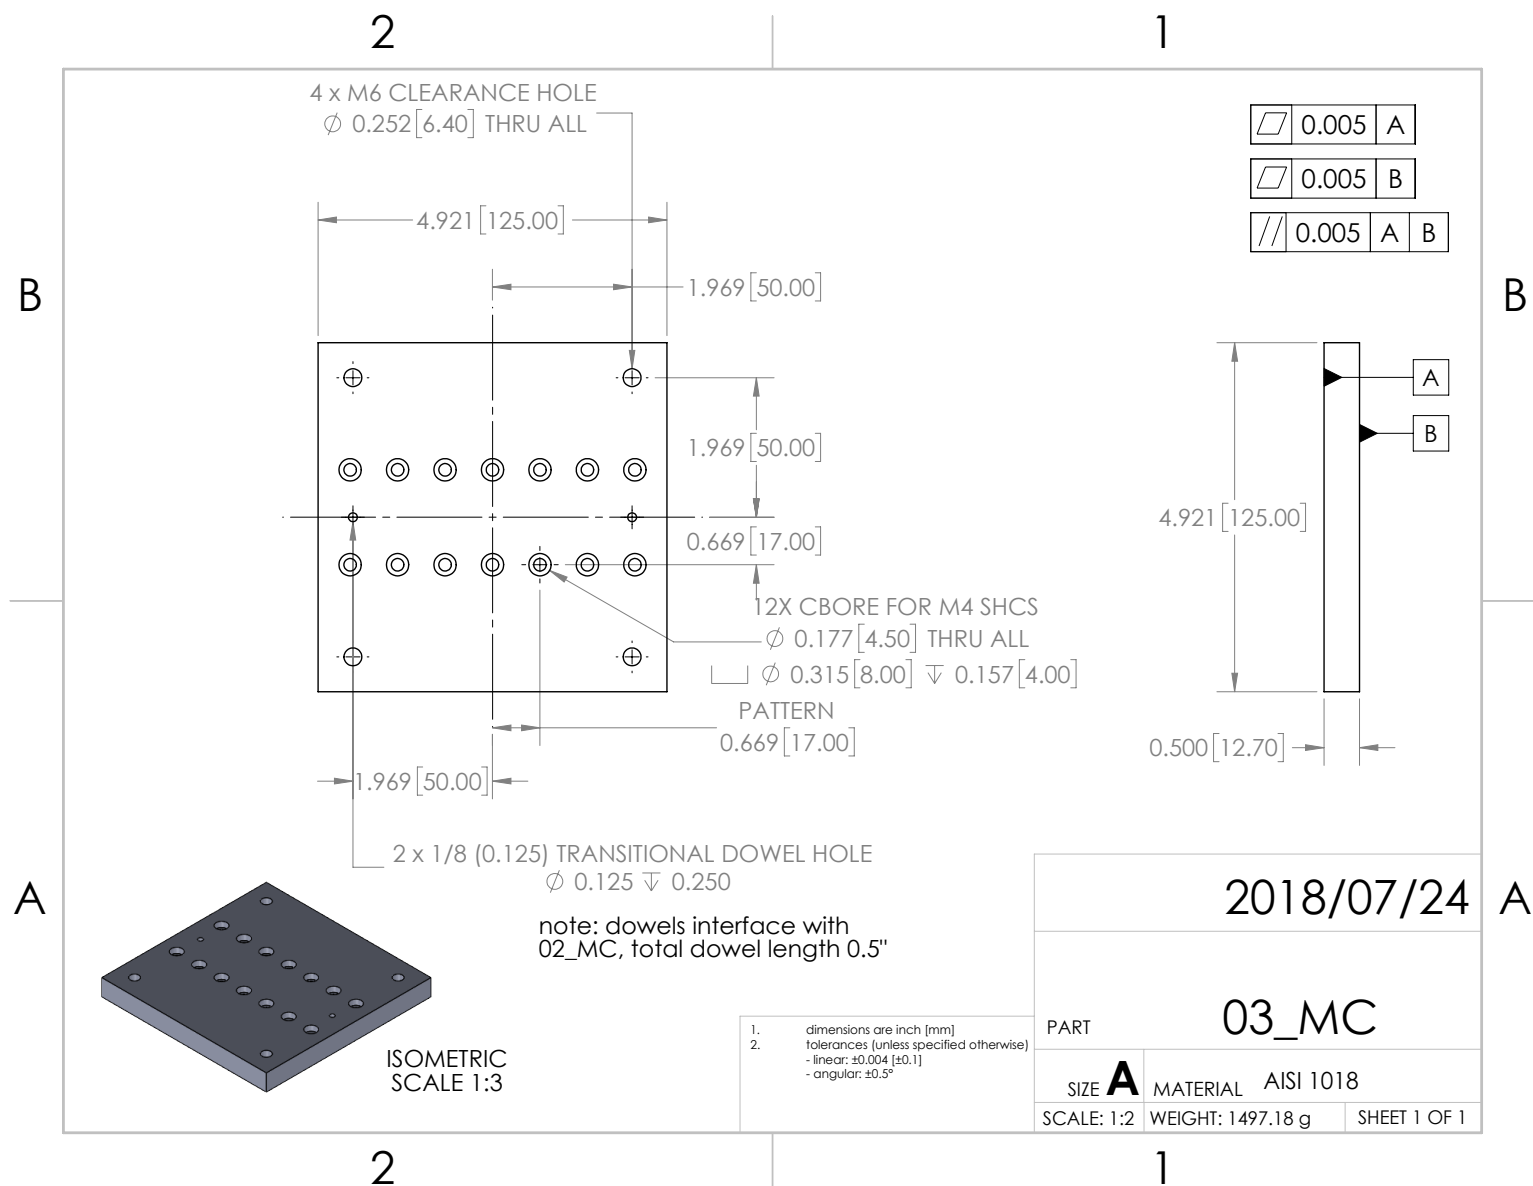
Fixture plate for mounting the manual stages to the angle plate (02_MC).
